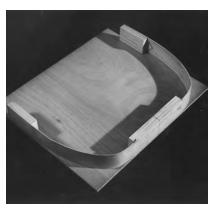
An example of how stock can be bent after it is thinned out. The thinned sections will be weak and should be reinforced with glue blocks.
